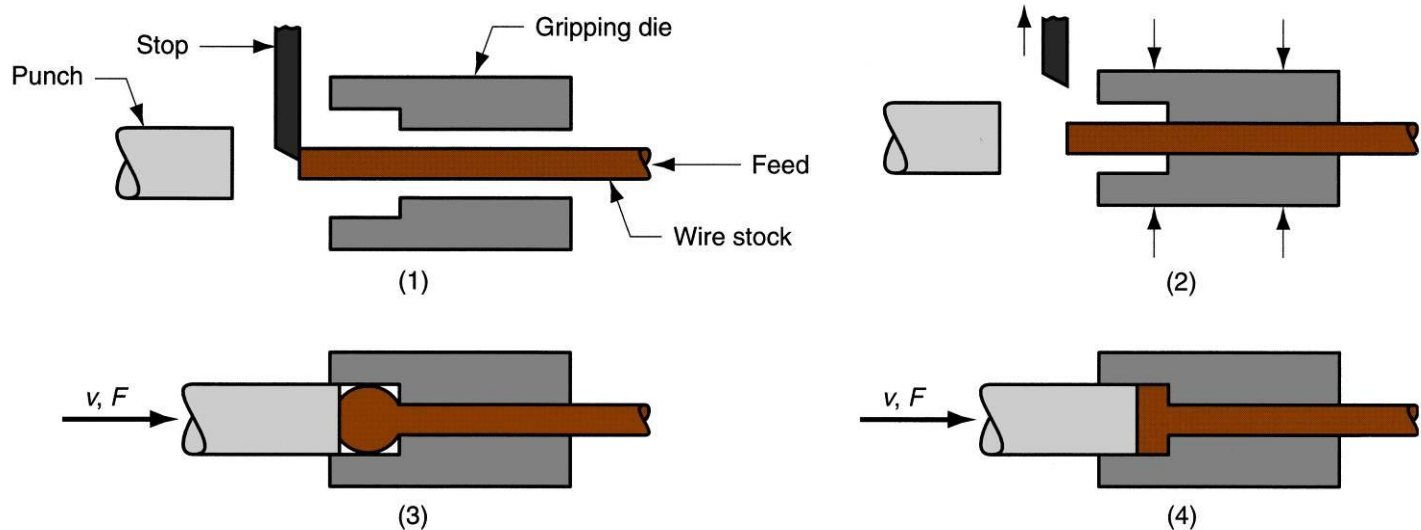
An upset forging operation to form a head on a bolt or similar hardware item. The cycle consists of: (1) wire stock is fed to the stop, (2) gripping dies close on the stock and the stop is retracted, (3) punch moves forward, (4) bottoms to form the head.
